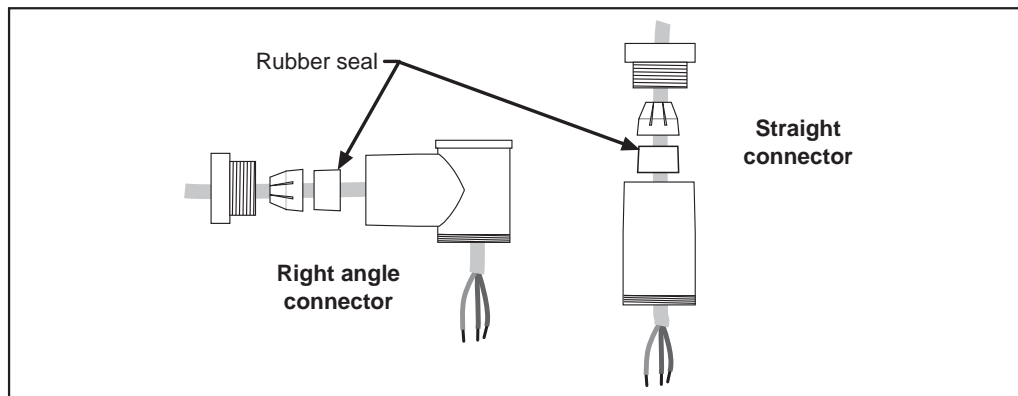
HDP Connector Showing Cable Being Threaded through Components
